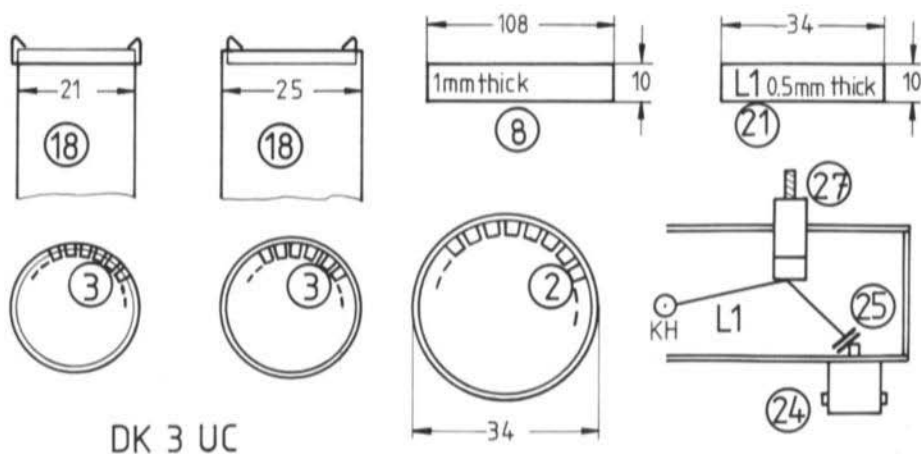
Anode contact ring and anode ring; the latter will not be necessary when the contact material is of the correct height. Two methods for making the grid tube and the grid contact ring. The input inductance and its construction.
